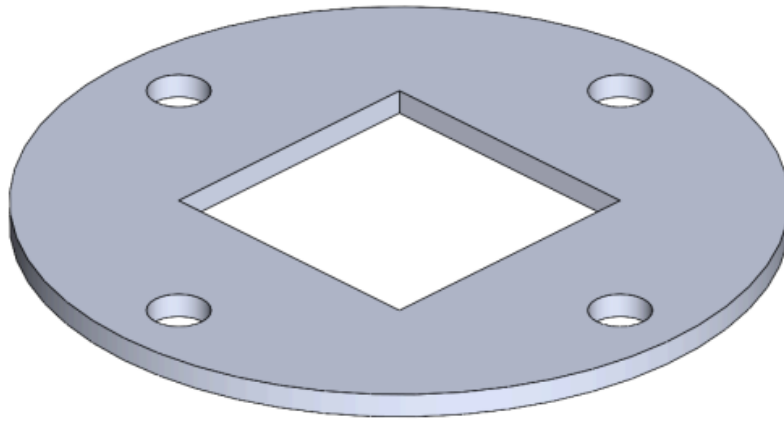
Picture of the mounting plate that is to be welded onto the shaft housing. It consists of a square hole for the shaft, and 4 circular holes for the 5/16 bolts.
